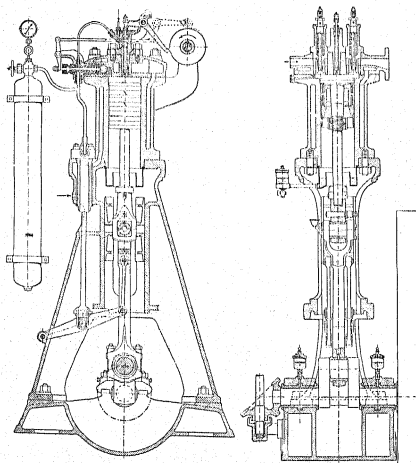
Sectional Side and Front Elevations of Diesel Engine
